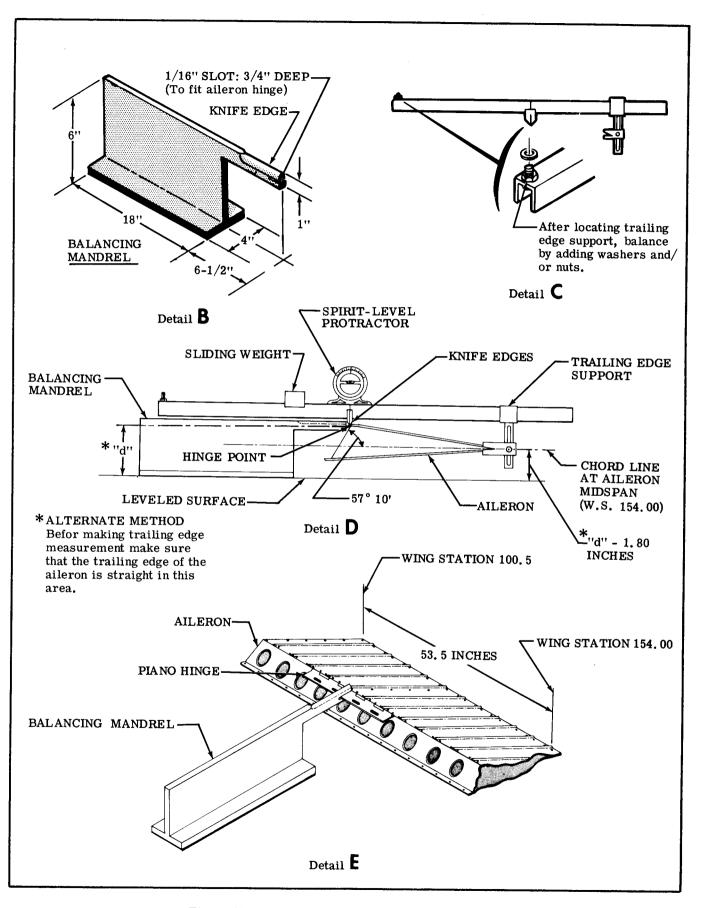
Control Surface Balancing (Sheet 3 of 5)
